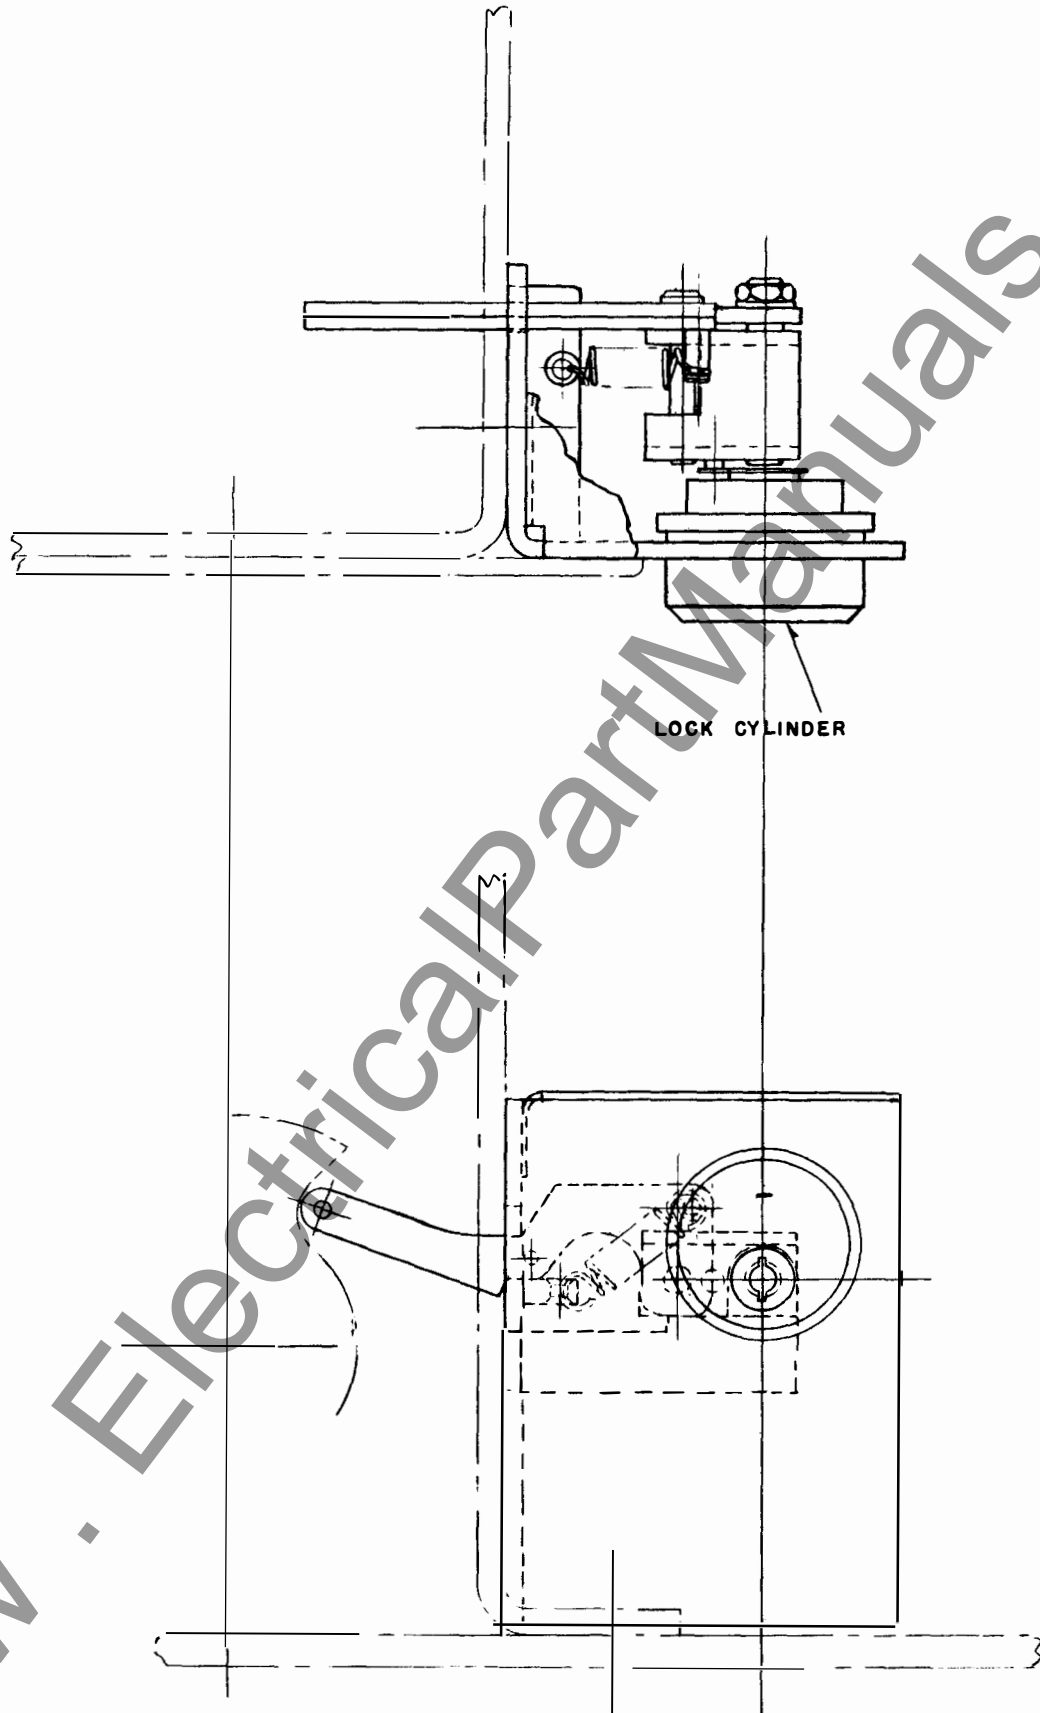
Key Lock or Key Interlock Attachment—Construction Details
